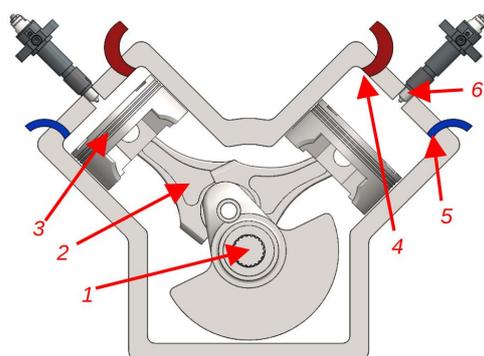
Representation of combustion engine with cylinders in “V” (such as the Wärtsilä 18V46). From [22].
